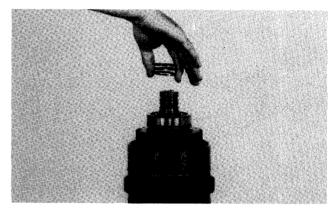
Install clutch shaft piston rings. See note in Figure 103.
